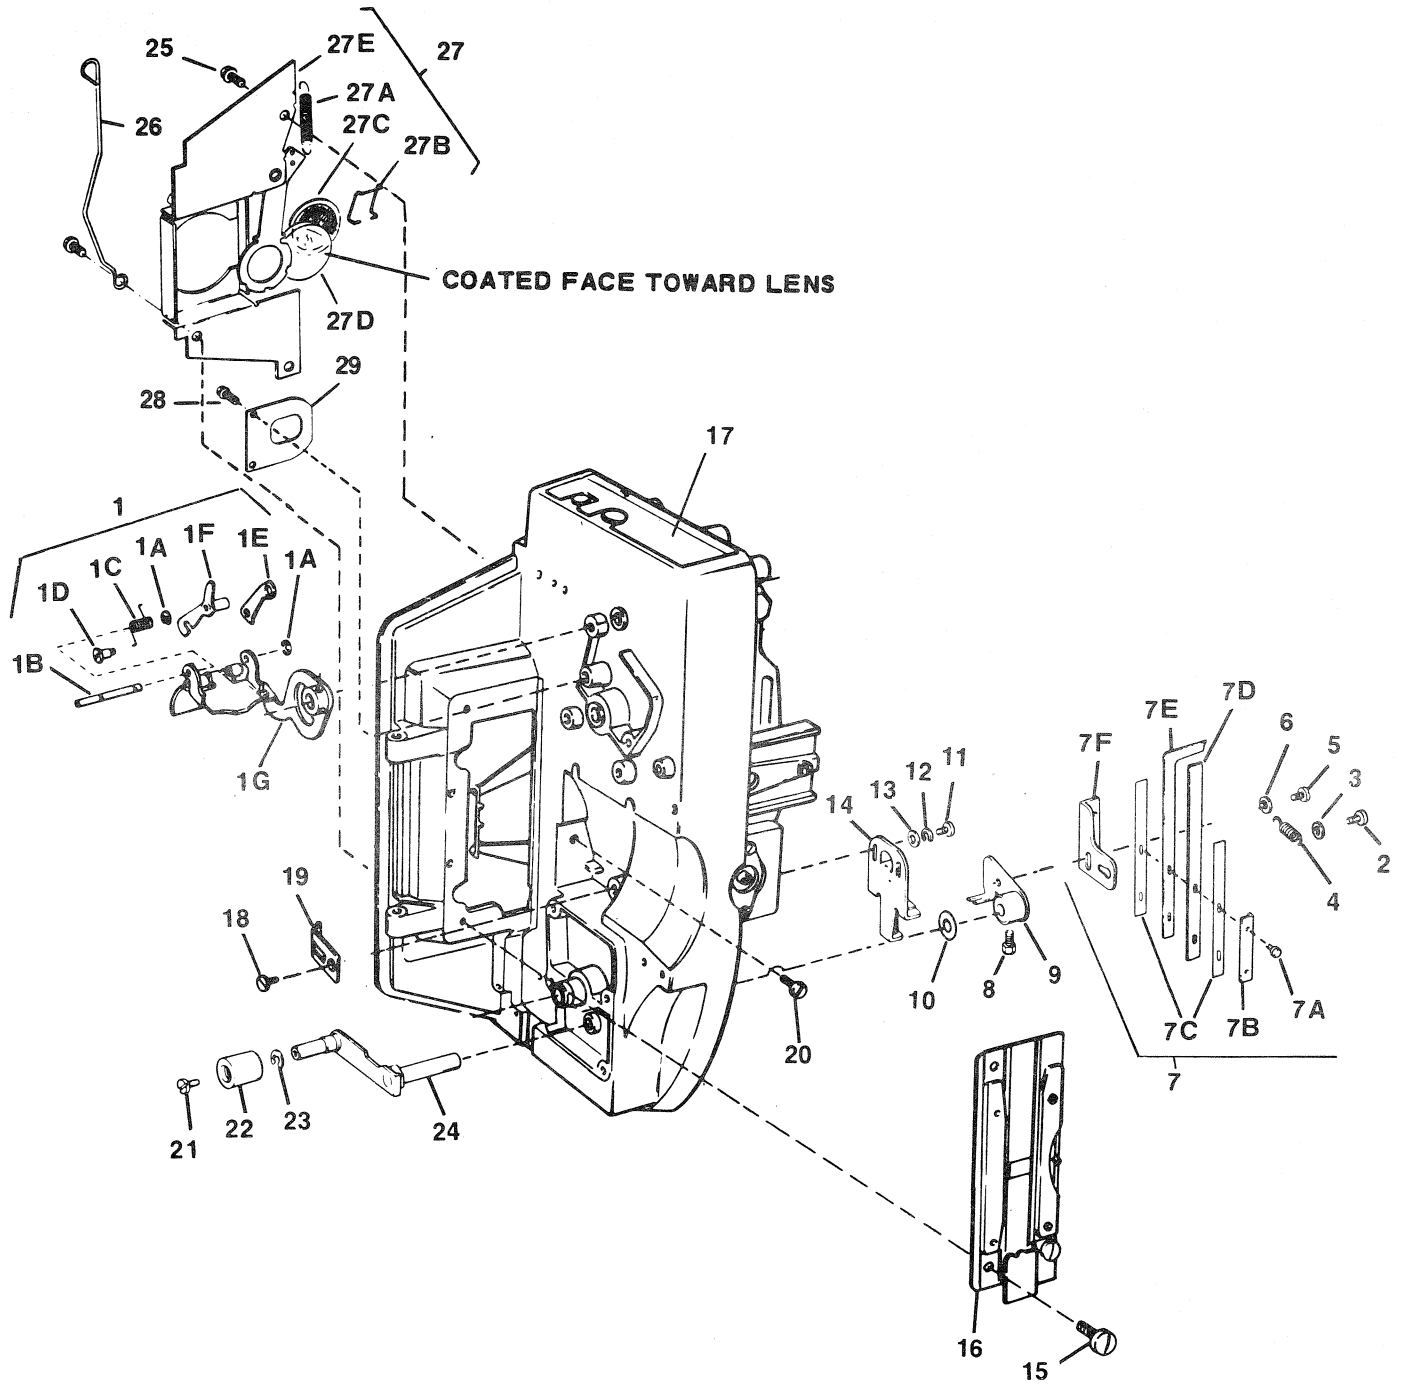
MECHANISM ASSEMBLY VIEW III
